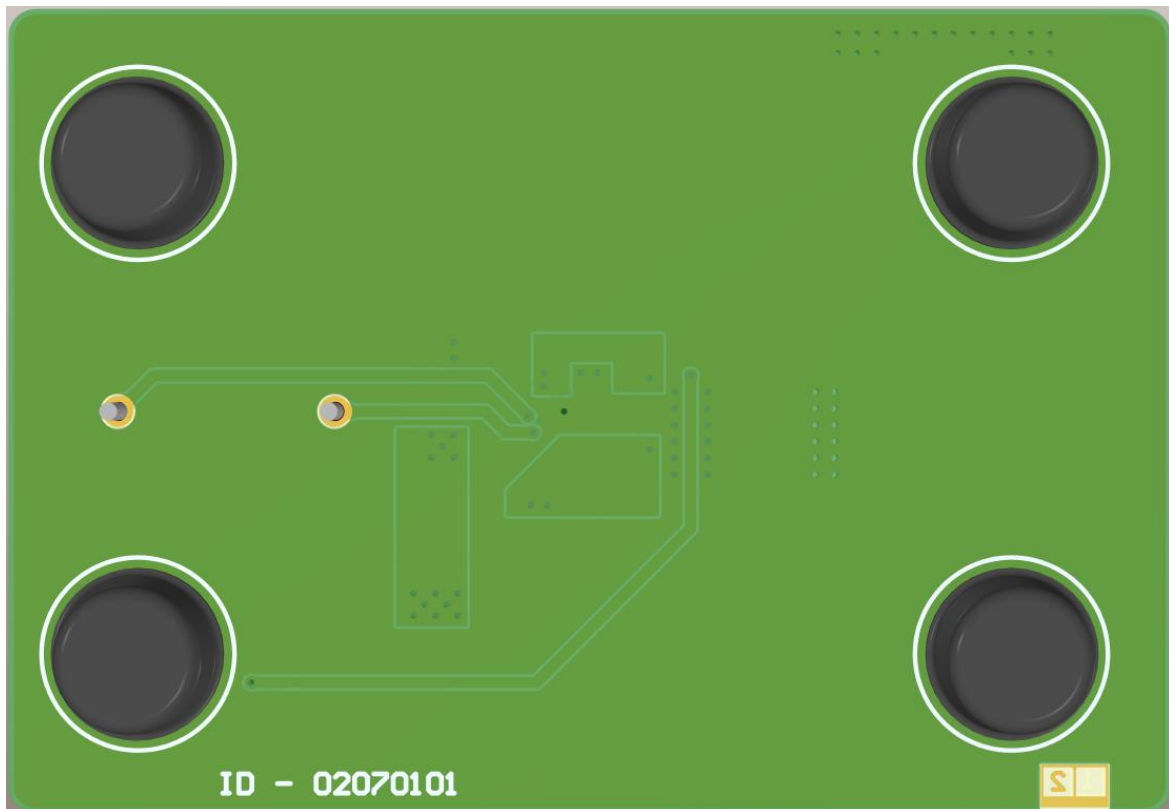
Boost & Buzzer Driver Demo PCB Design (Bottom Side)
